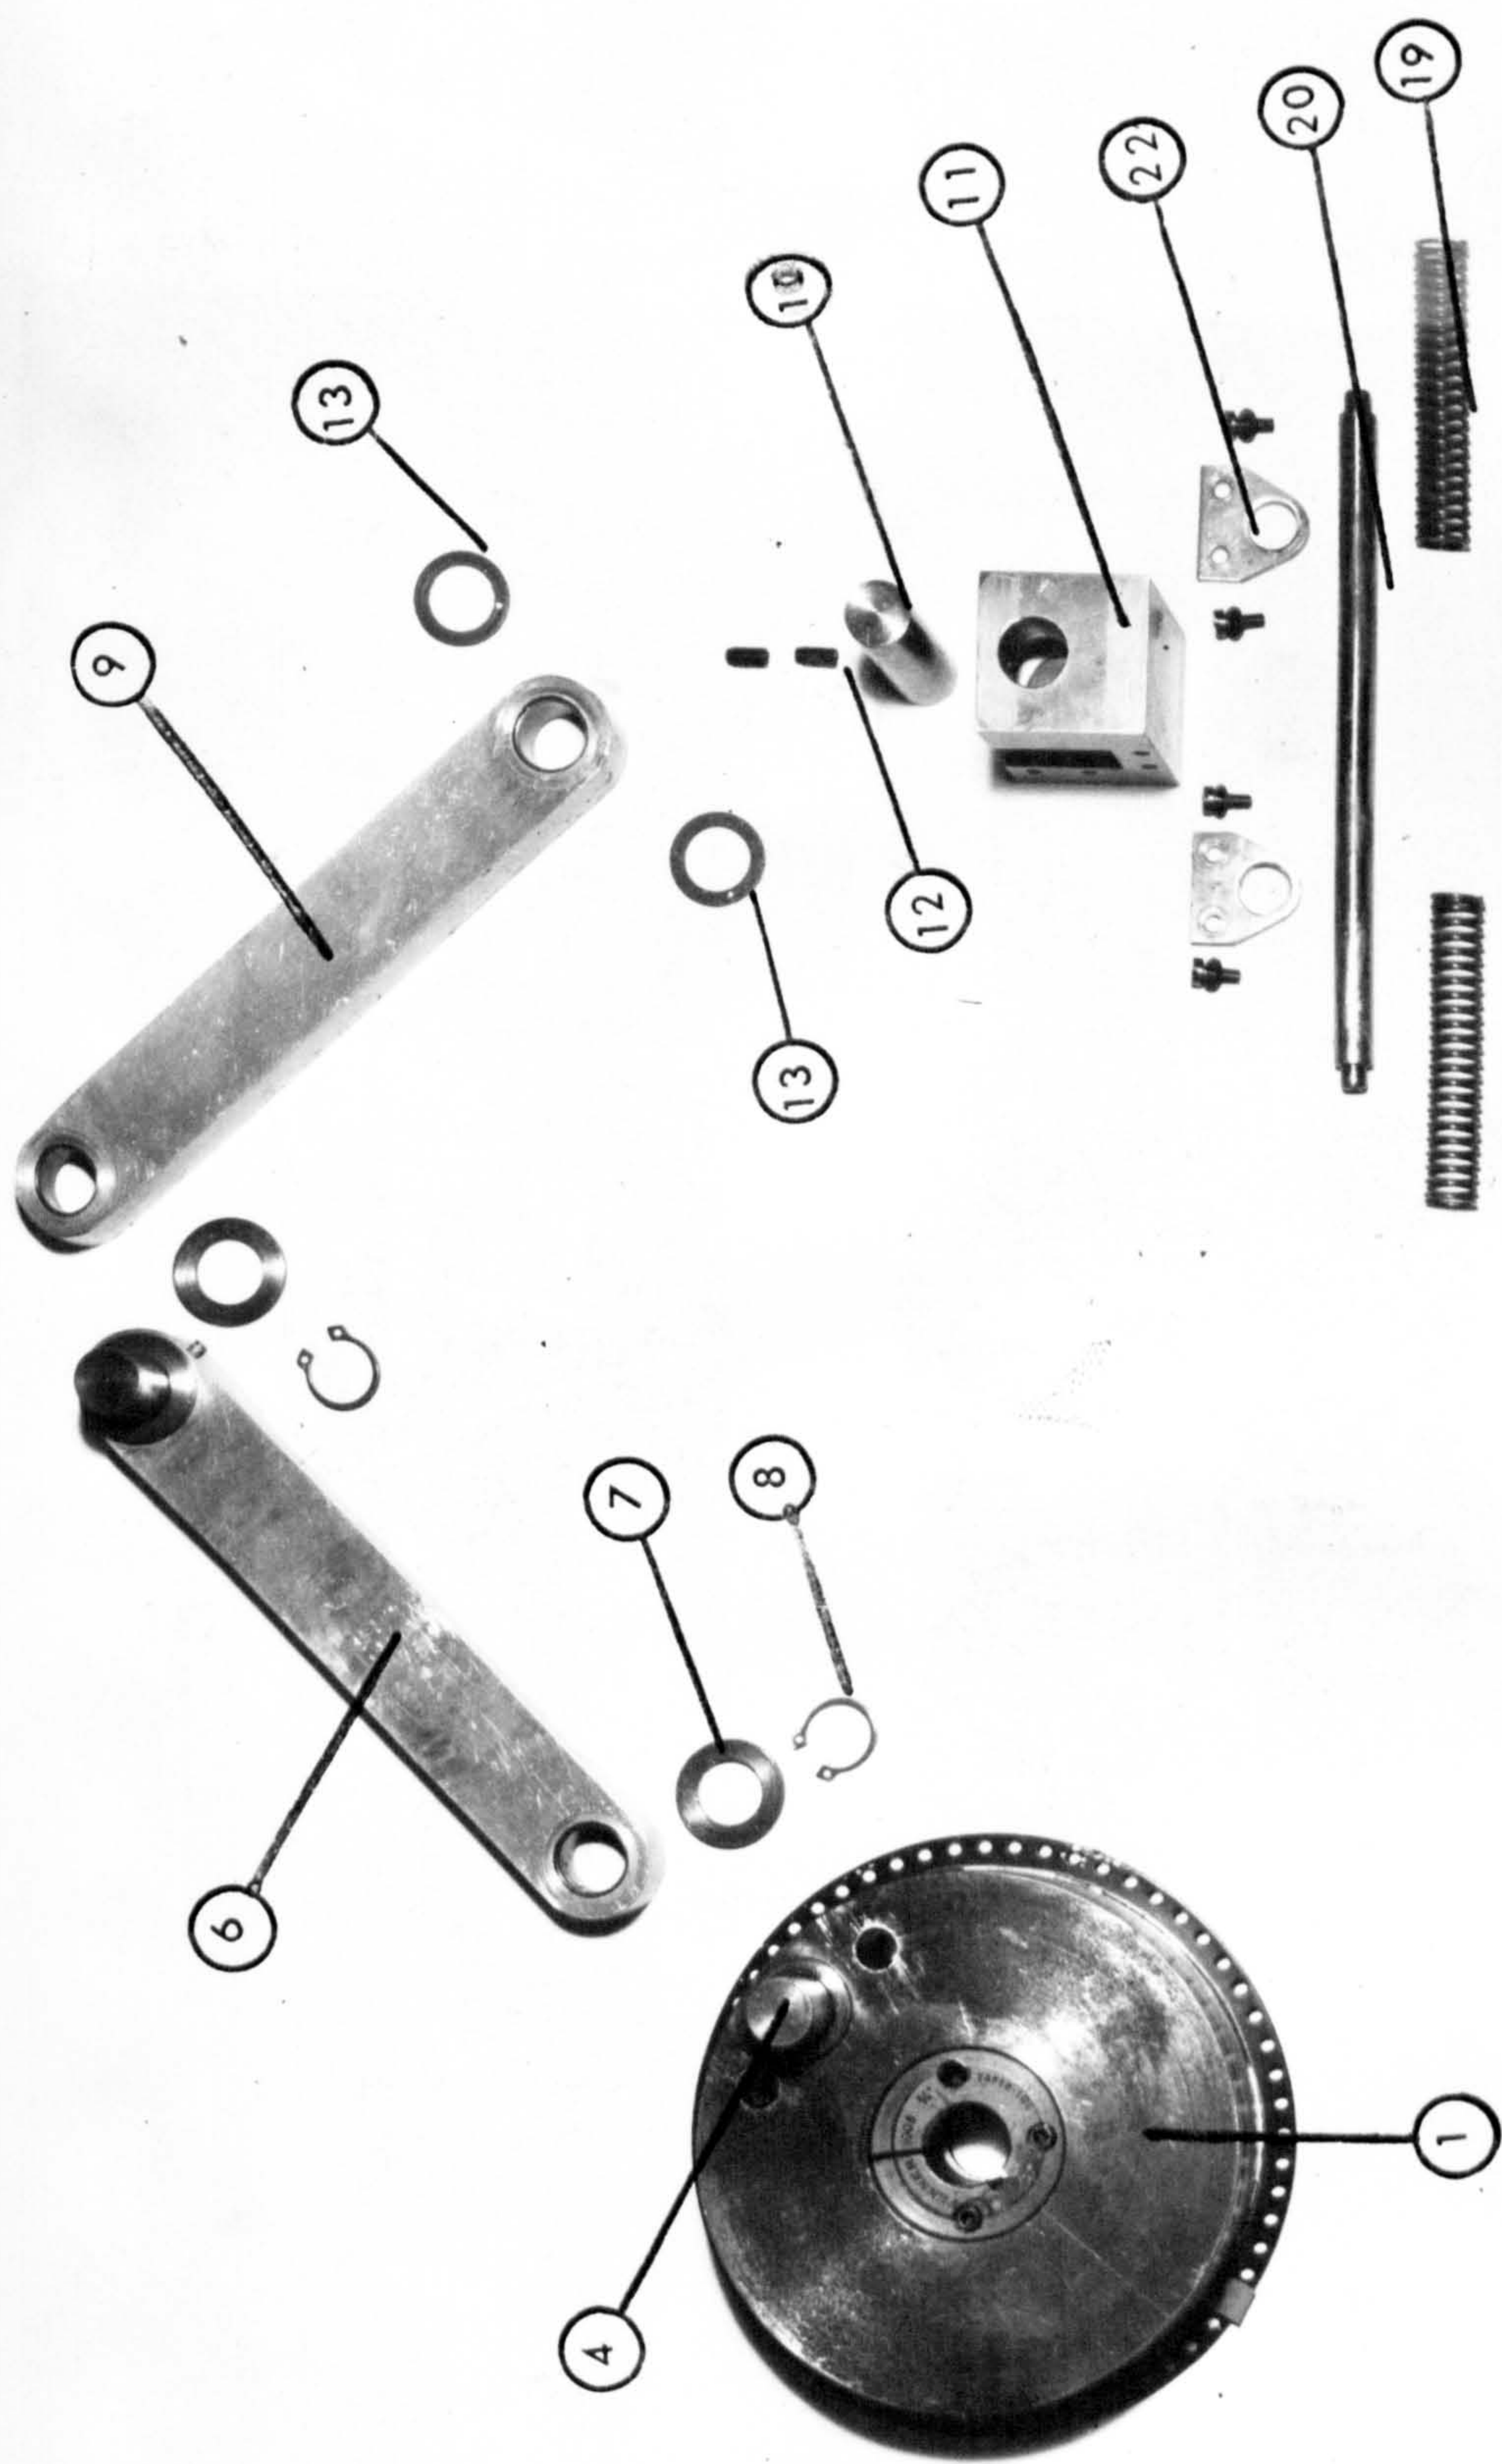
AN EXPLODED VIEW OF THE LINKAGE OF EXPERIMENTAL RIG 1.
